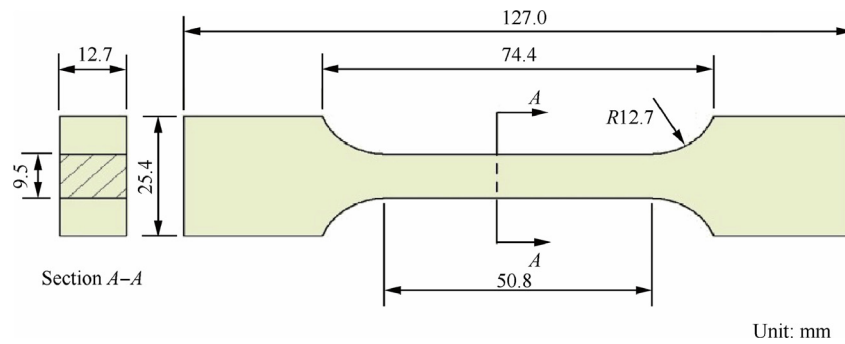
Standard dimensions of the uniaxial tensile specimen.<sup>27</sup>
